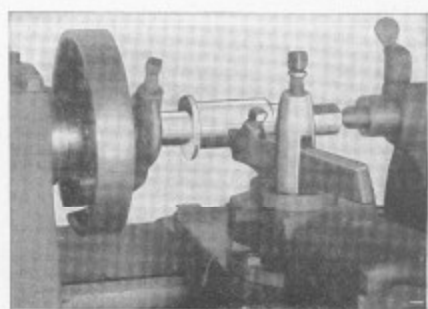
Making a Replacement Bushing on a Mandrel between the Lathe Centers.
